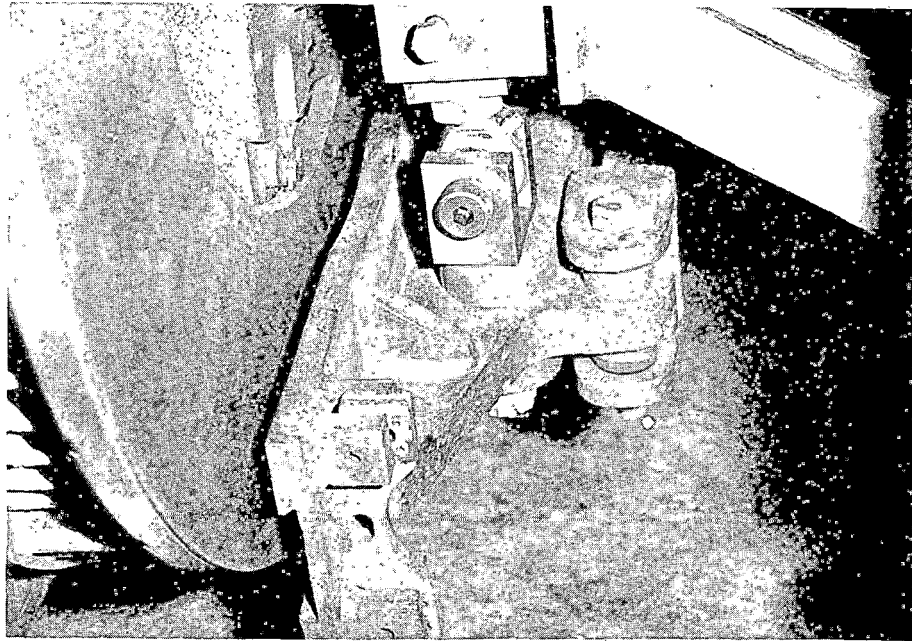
FORK BOLT ASSEMBLED ON DISC BRAKE CALIPER.
